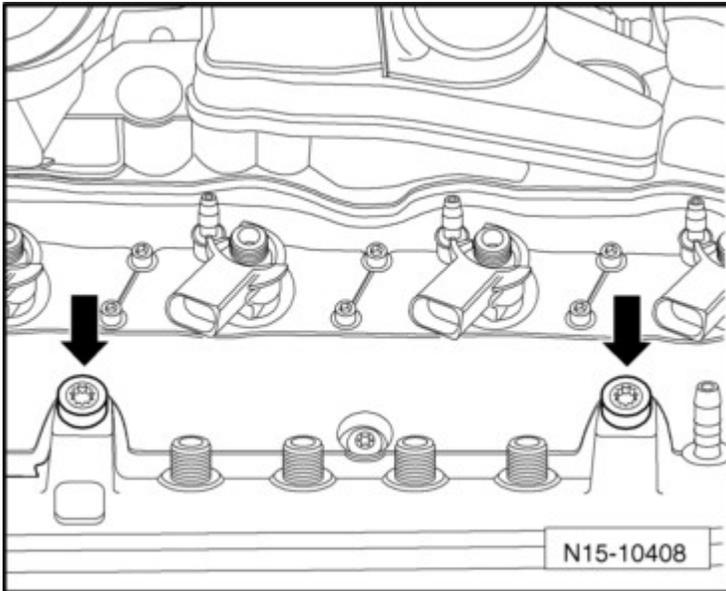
Identifying Bolts -Arrows- And Fuel Rail
